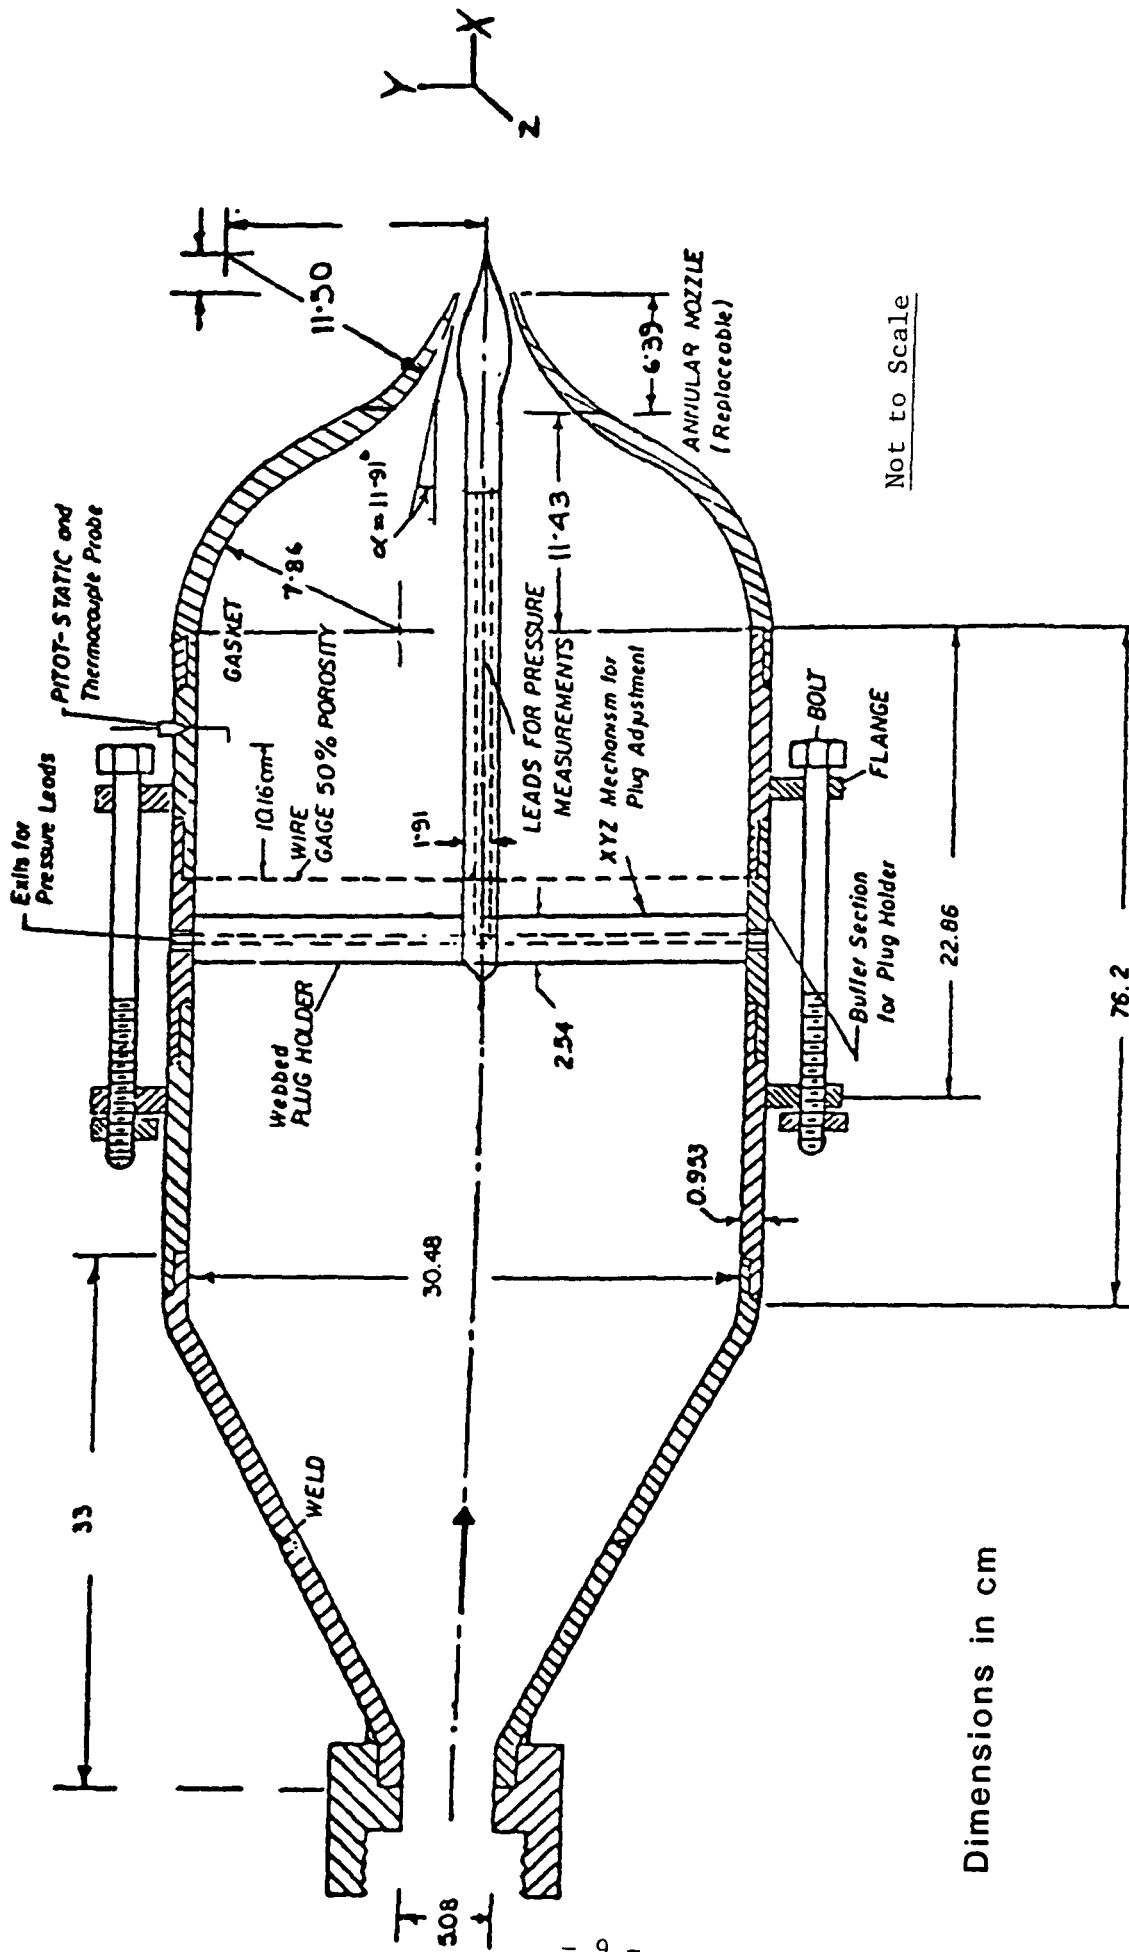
Plenum-Chamber and Plug-Mounting Assembly for the Plug-Nozzle.
